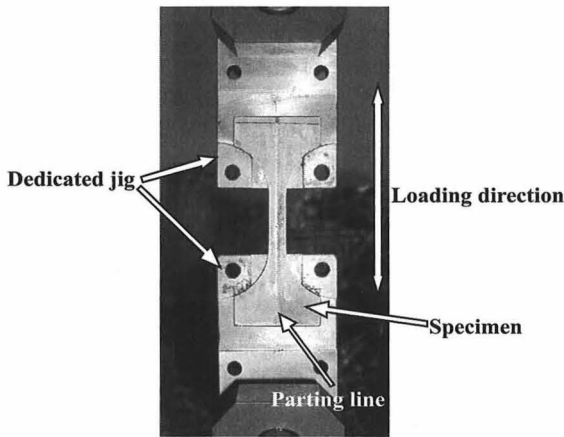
A fatigue specimen with casting surface and the setup of fatigue test, which used a dedicated jig.
